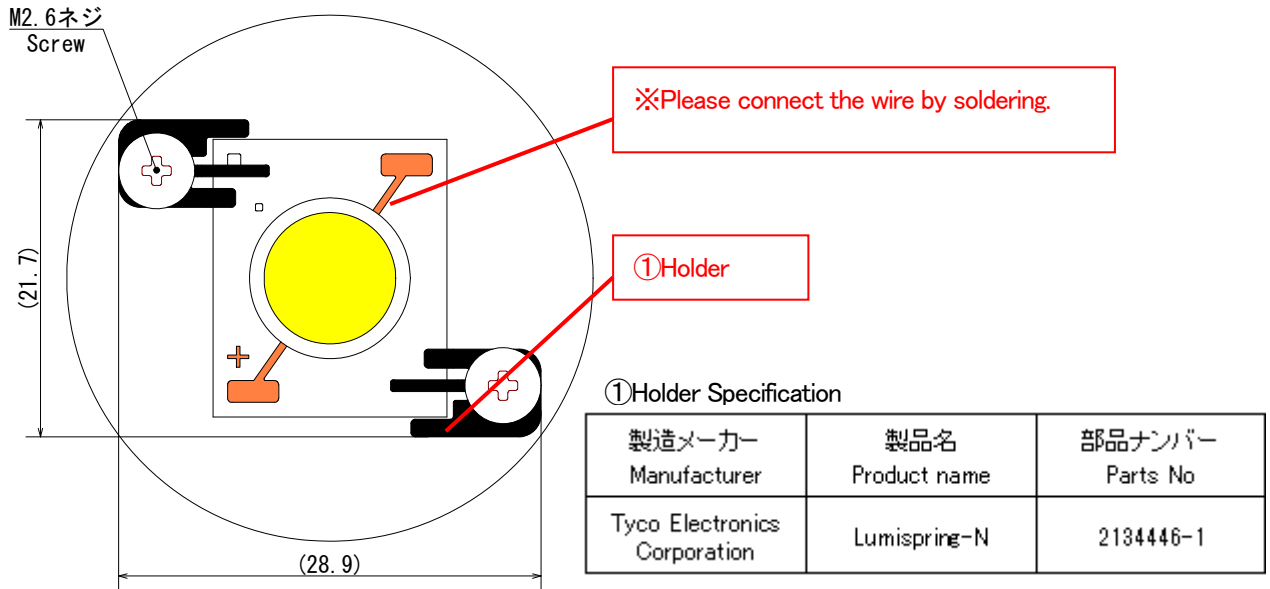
Specification drawing of the COB holder (Lumispring-N)
